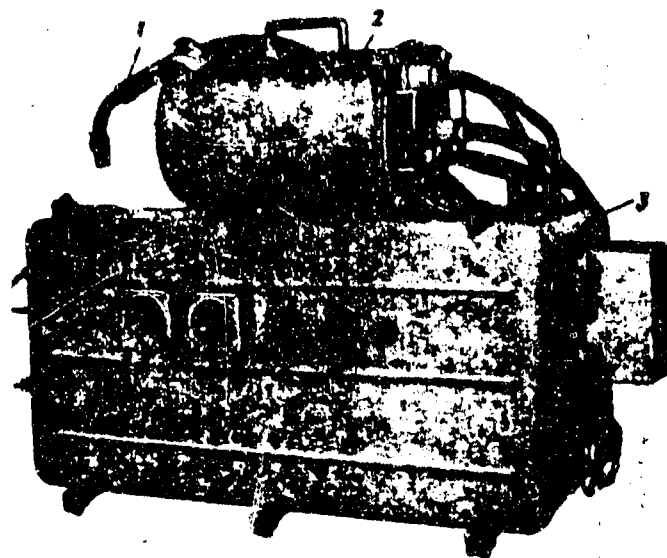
Semiautomatic Device for Underwater Welding and Cutting (Type PPSR-300-2): 1 - head (torch) with lever for remote-controlled activation of welding current and supply of electrode wire; 2 - sealed tank with mechanism for supplying the wire; and 3 - control cabinet.
